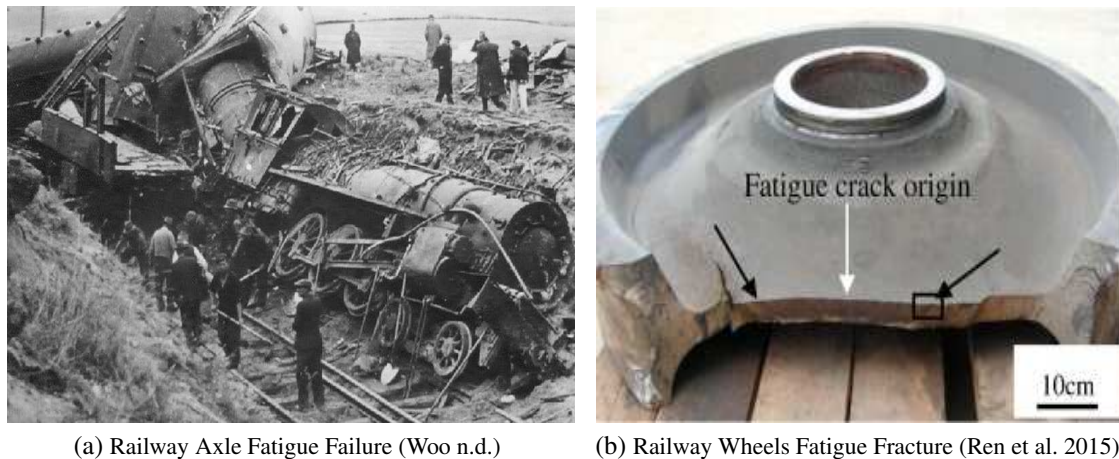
Fatigue Failures of Railway Wheels and Axle
